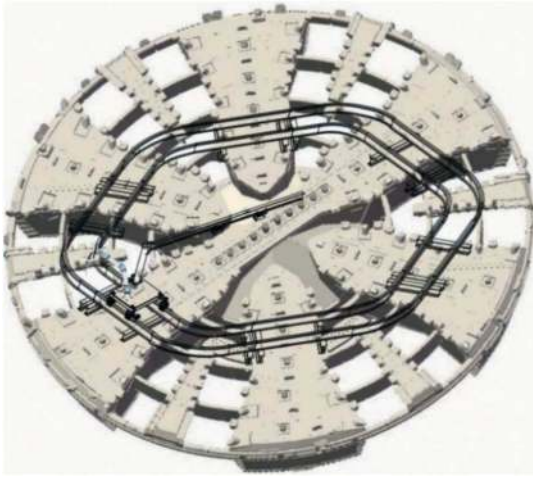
Welding preview image of the TBM cutterhead mobile welding robot.
